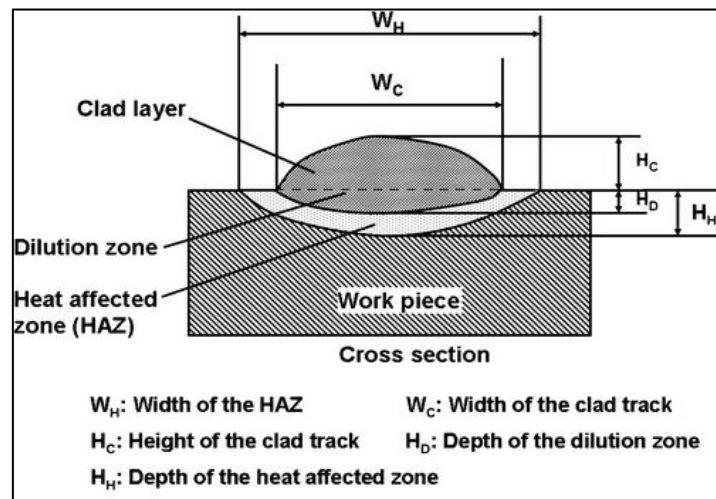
Schematic weld profile showing, HAZ, dilution and clad layer [38]
